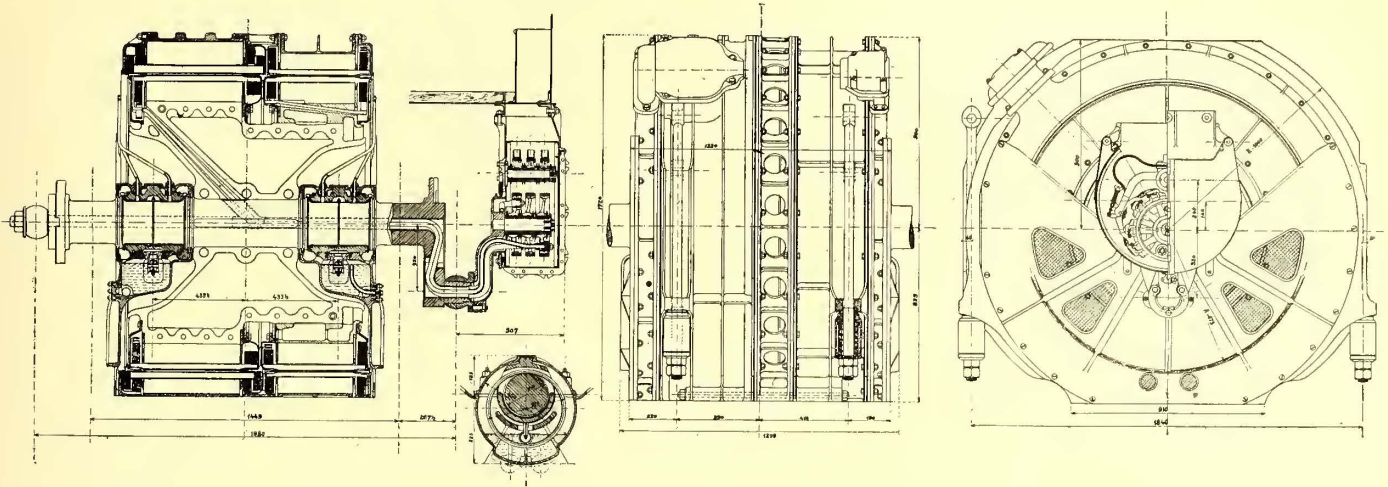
SECTION AND ELEVATIONS OF MOTOR
